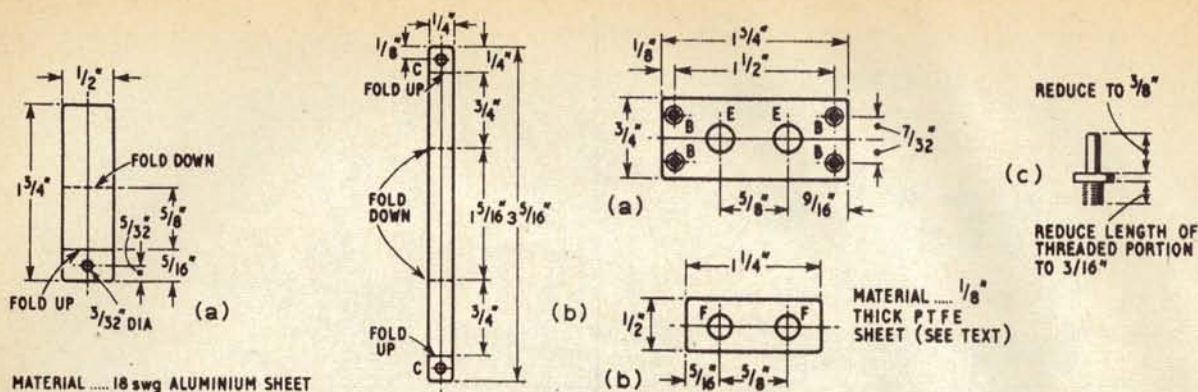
Coil mounting details. At top left is the coil socket, with the plug base below. At right is the modified plug pin used for range D.
